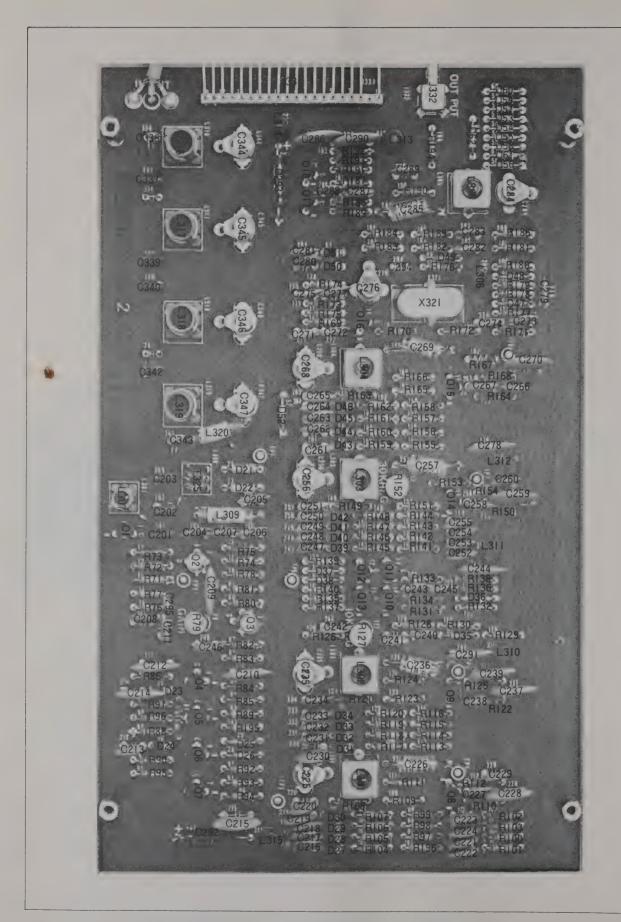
IF FILTER Bd LAYOUT (SK030)
